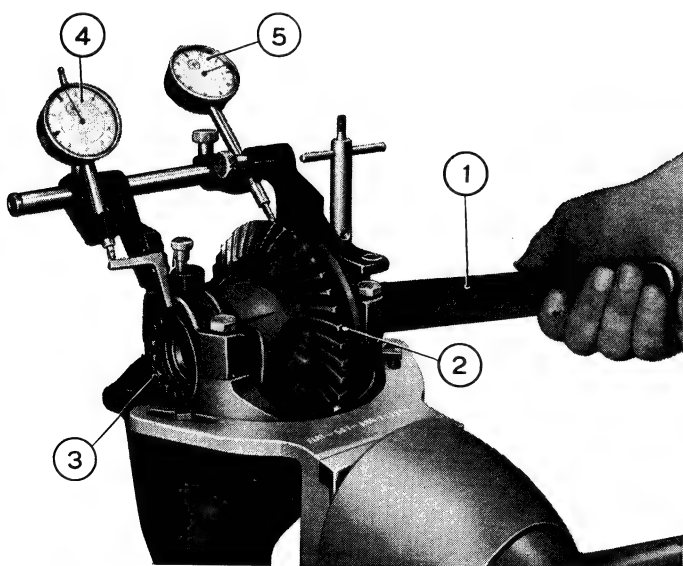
Tightening bearing adjusters to preload differential case roller bearings.
